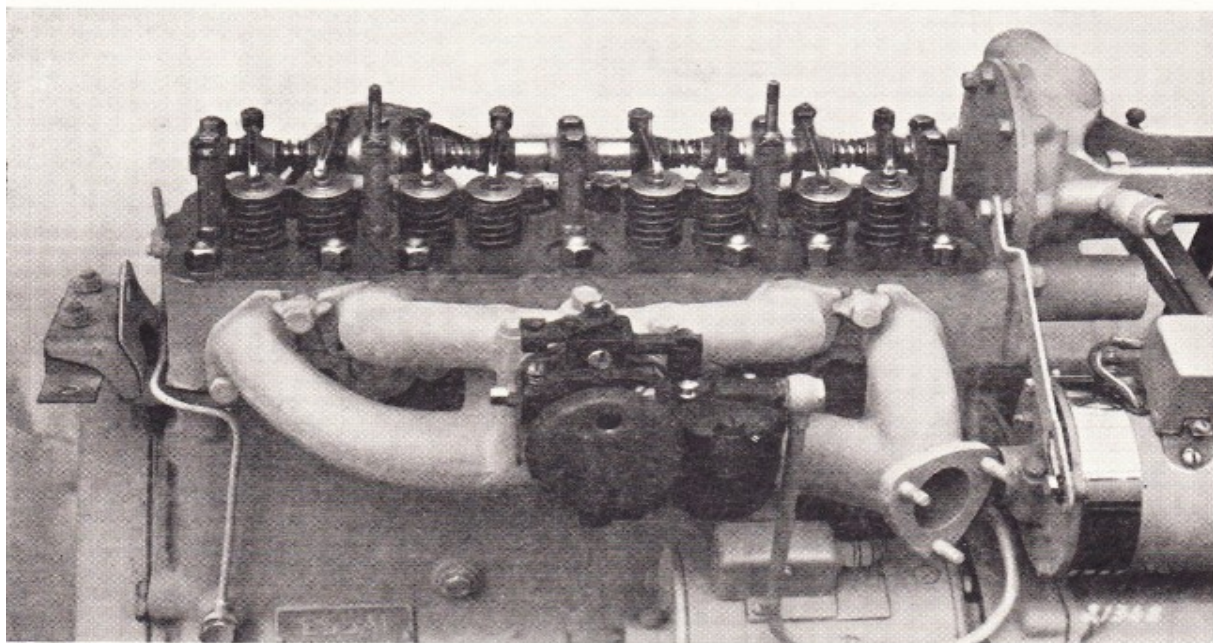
The Citroën Front-drive Four-cylinder Engine.
